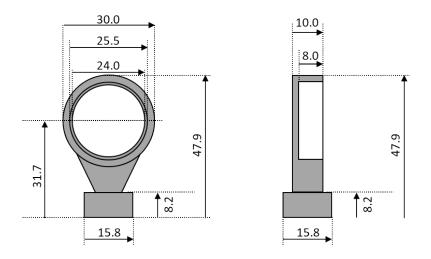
Technical drawing of lens mount. All dimensions are in mm.
